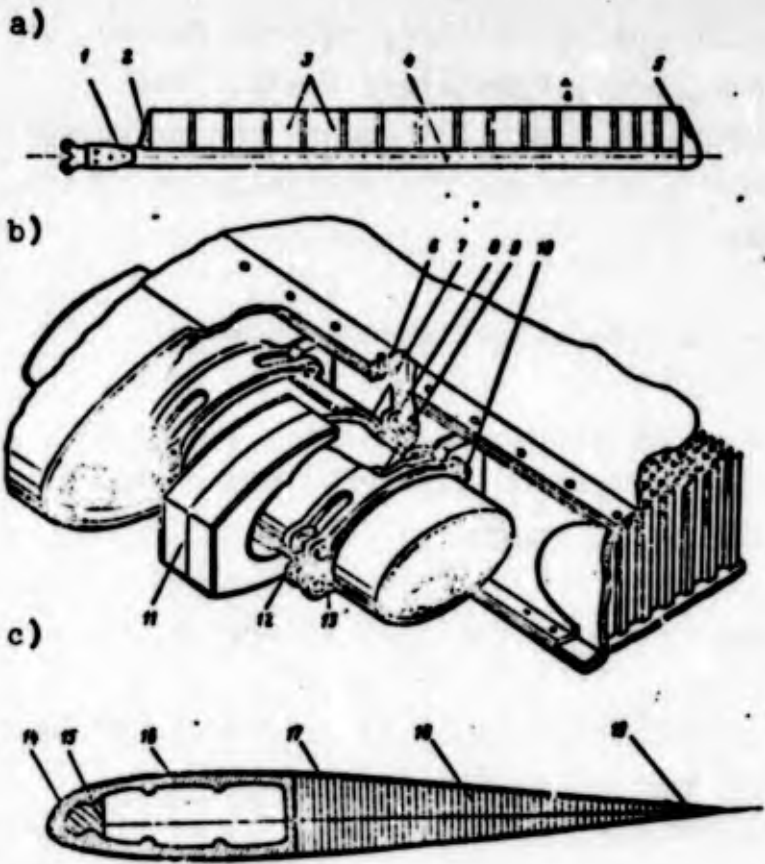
Design of a metallic blade: a) blade in assembled form; b) attachment of the rear section to the spar; c) cross section of metallic blade with duralumin spar; 1 - root part; 2 - root fairing; 3 - profiled sections; 4 - spar; 5 - tip fairing; 6 - rear socket; 7 - journal; 8 - tubular spar; 9 - clamp; 10 - clamp attachment to rear section; 11 - foam-plastic unit; 12 - cross piece; 13 - strip; 14 - safety covering; 15 - weight compensator; 16 - spar; 17 - skin; 18 - honeycomb filler; 19 - stringer.
